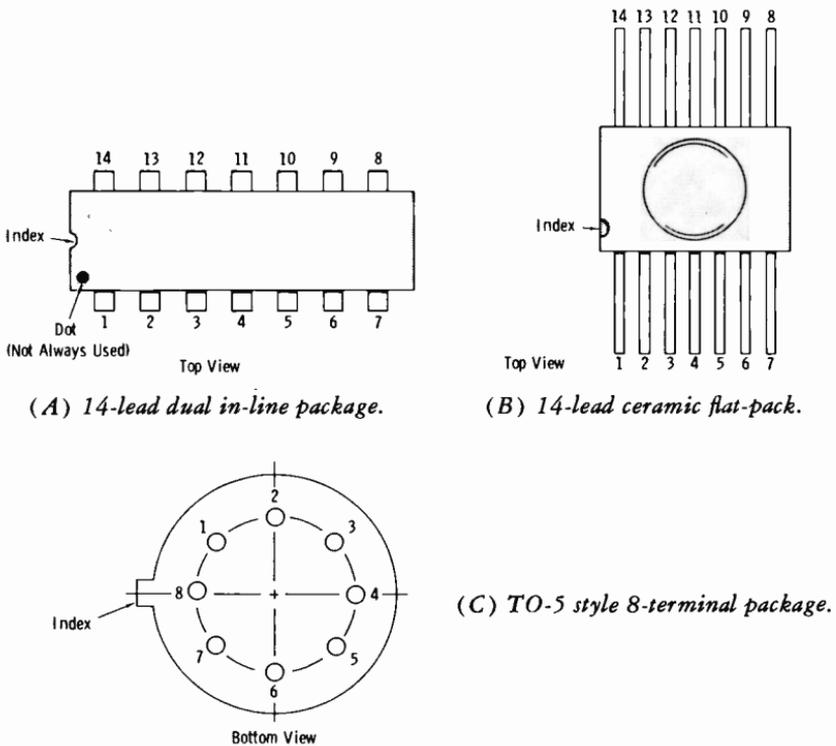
Basic integrated-circuit packages and terminal arrangements.
